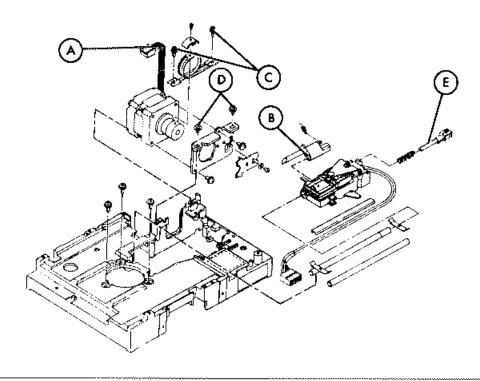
STEPPER MOTOR REMOVAL/REPLACEMENT
